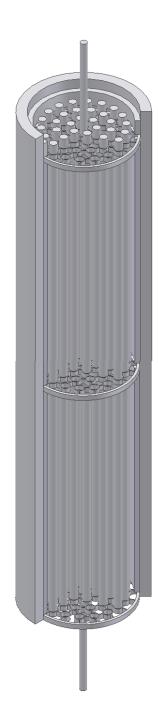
Stringer fuel assembly for an LS-VHTR.
